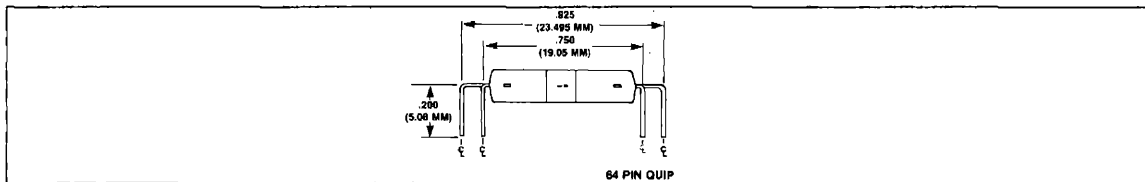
R6541Q & R6500/43 Dimensional Outline
